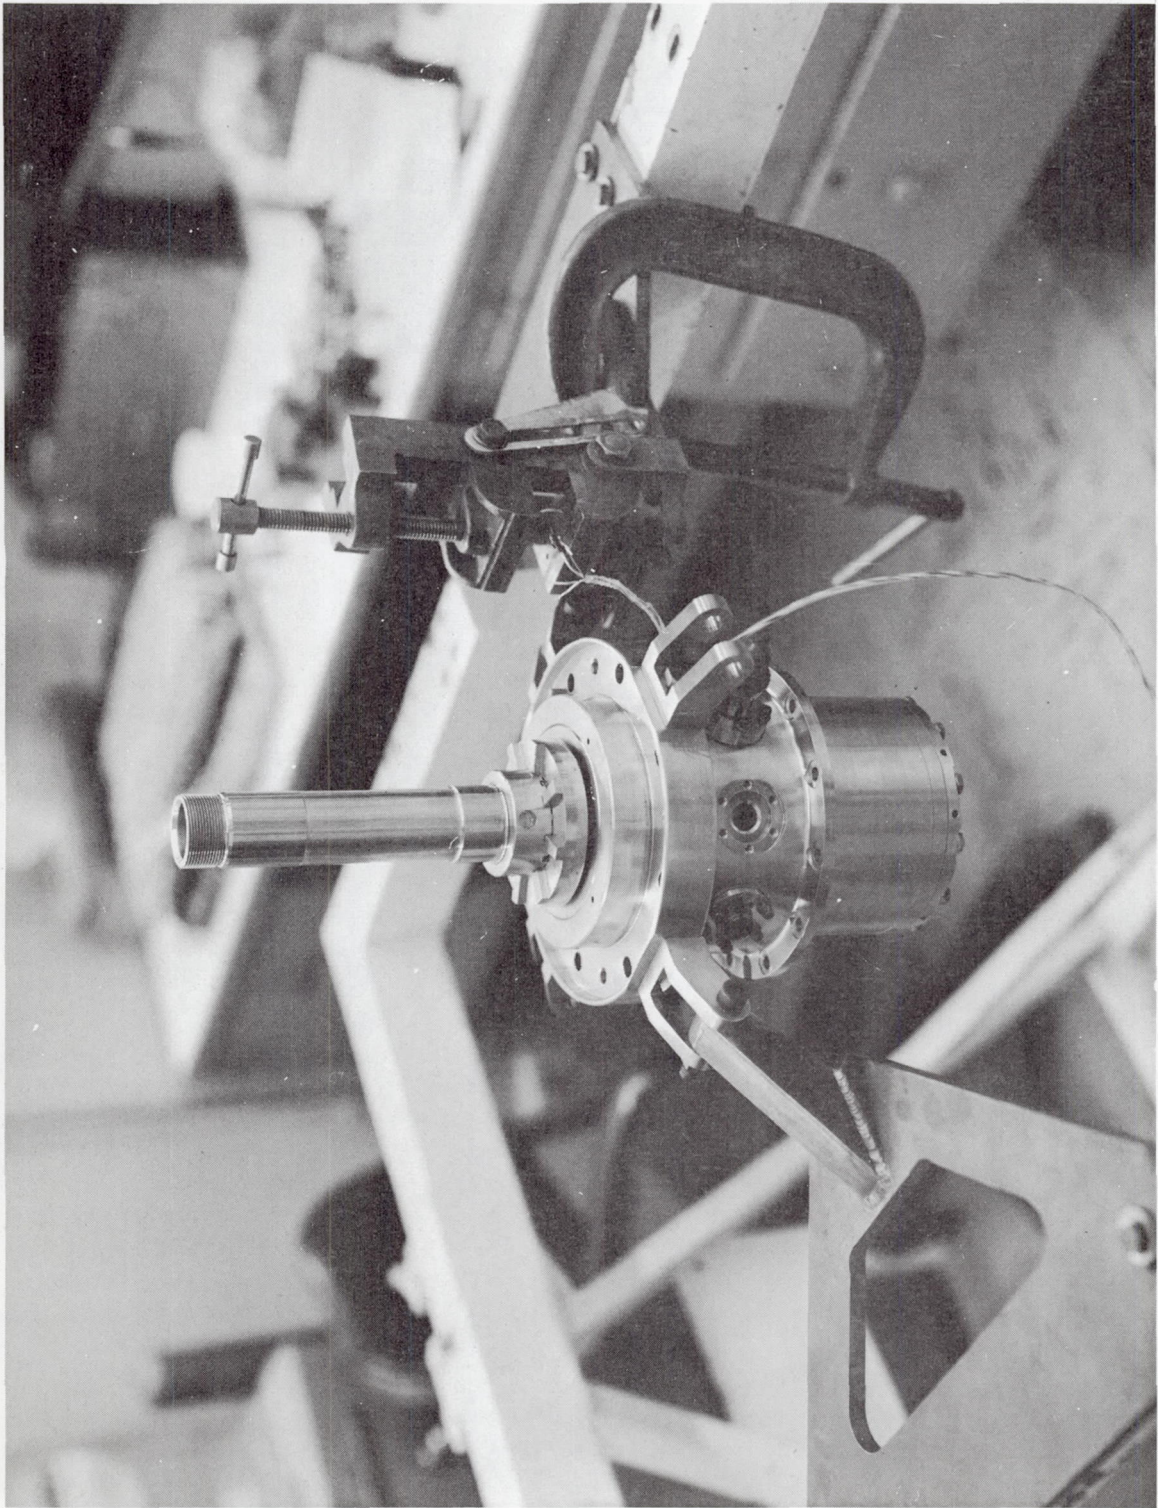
Shaft/Coupler - Bearing Housing Assembly.
